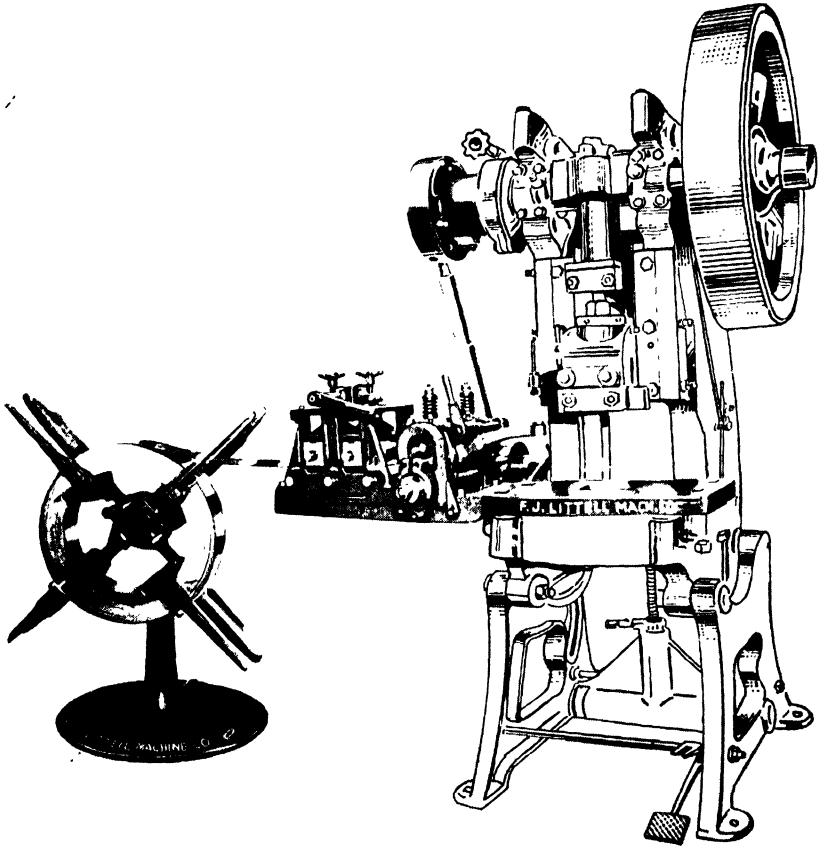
A ball-bearing reel with coil from which strip is pulled through a roll straightener by a pair of feeding rolls. The rolls and straightener are mounted together on one base plate.
